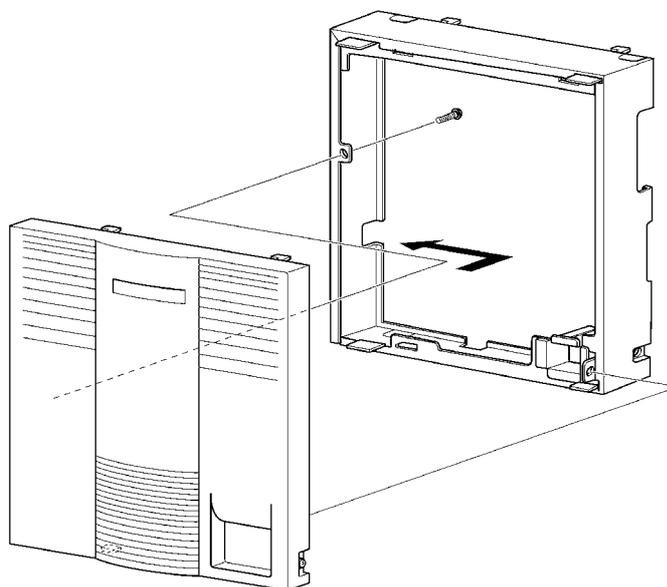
Attaching the Front Cover and Front Cover Extender
